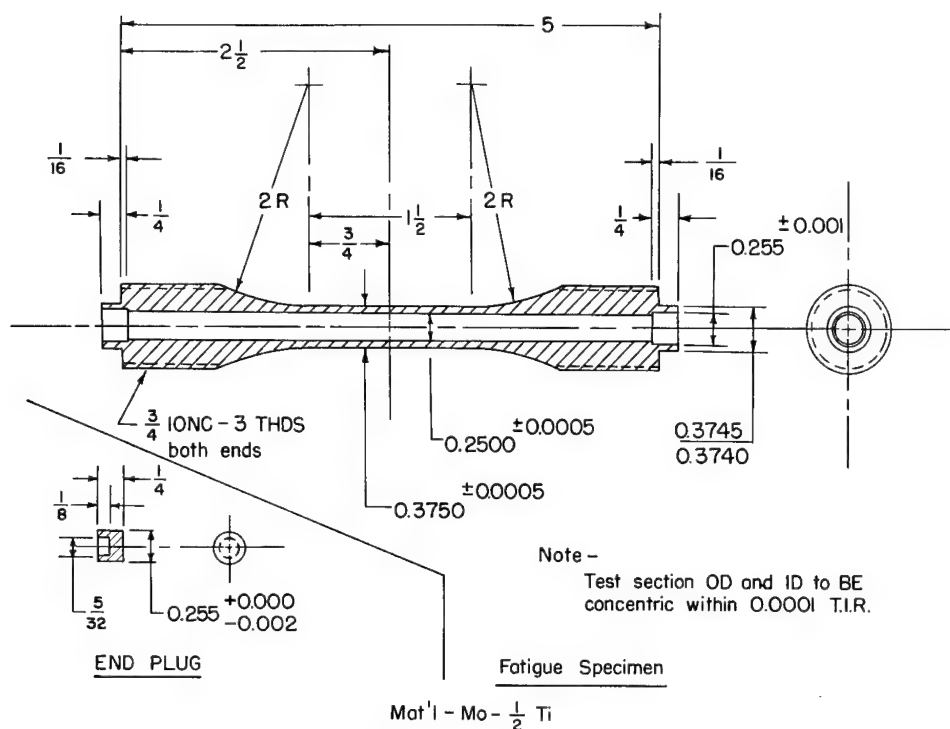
Dynamic creep specimen for modified Ivy machine.
